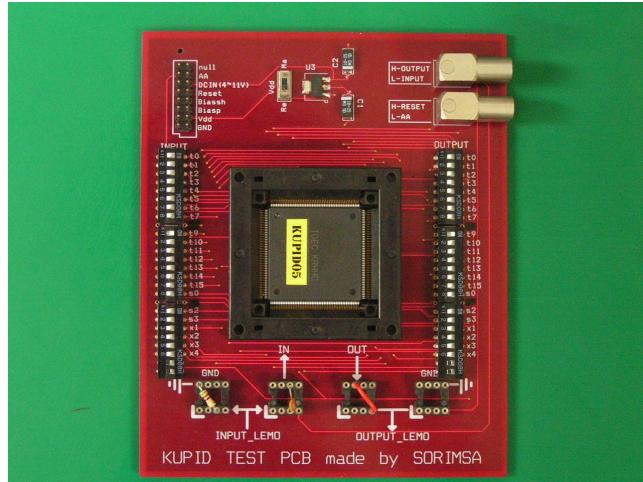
A PCB board fabricated for KUPID v1.0 is shown. In the PCB board, there is a voltage regulator which stabilizes VDD voltage to 1.8 V.
